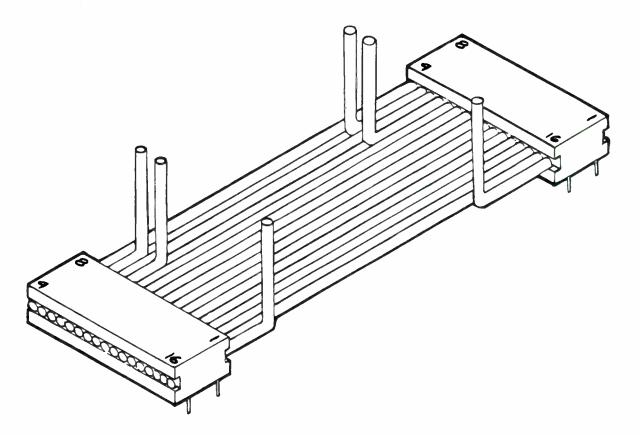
An illusration showing how the cut DIP jumper wires should look once the modification is complete.
